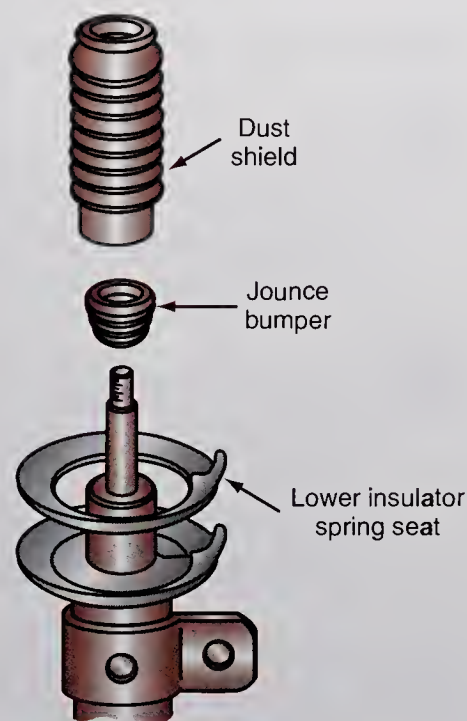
Removal of the dust shield, jounce bumper, and lower spring insulator.
